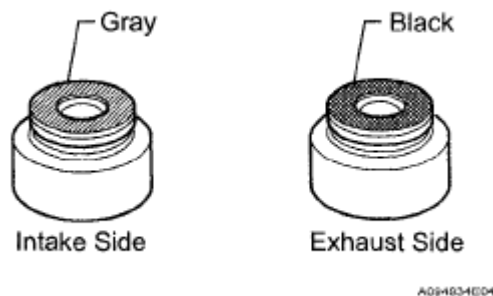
Applying Coat Of Engine Oil To Oil Seals
